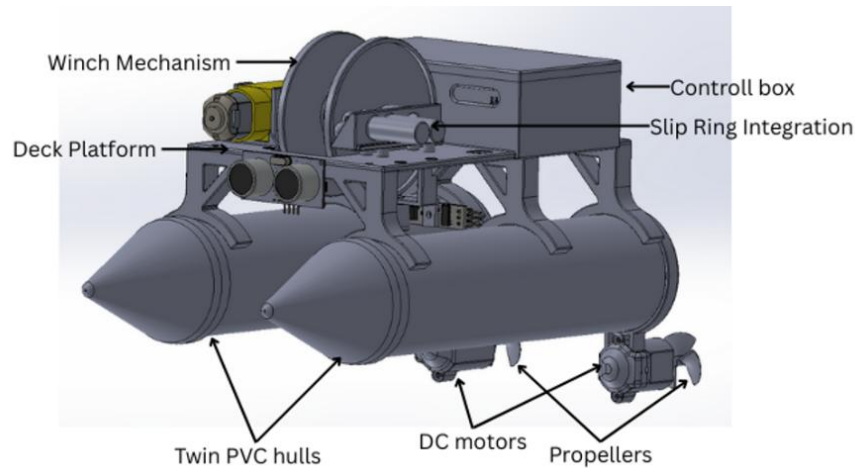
SolidWorks assembly model of the integrated hull design.
